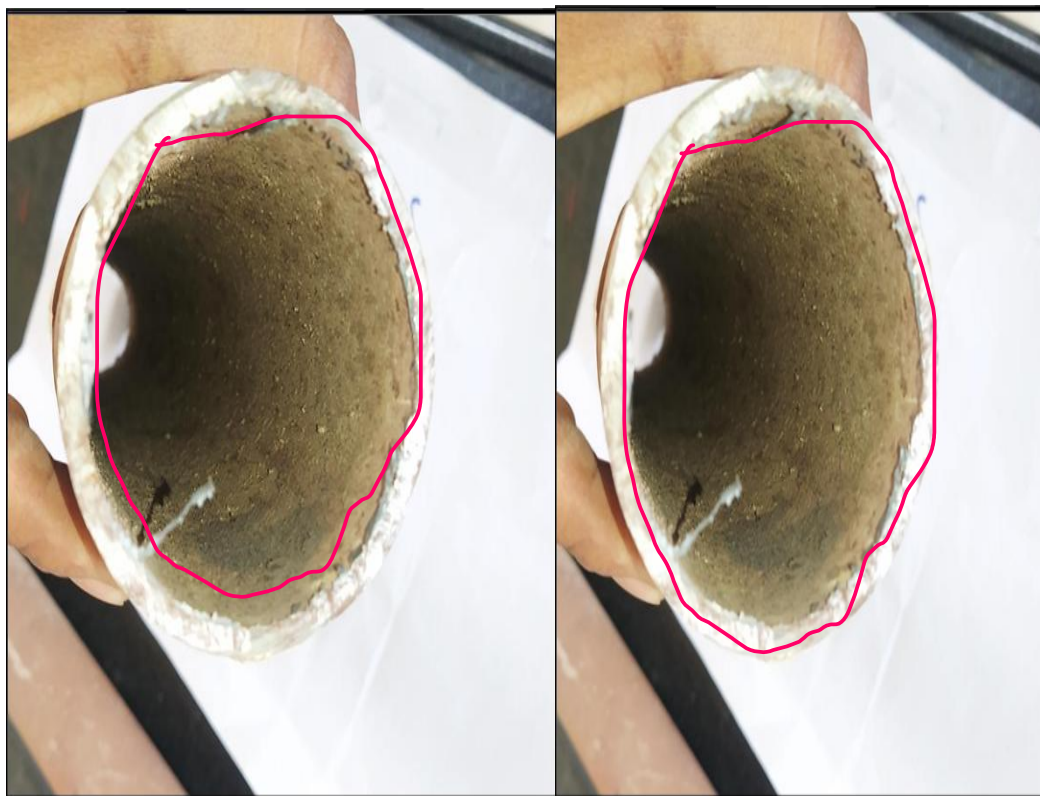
Pitting corrosion observed on the inner diameter (ID) of the boiler tube.
